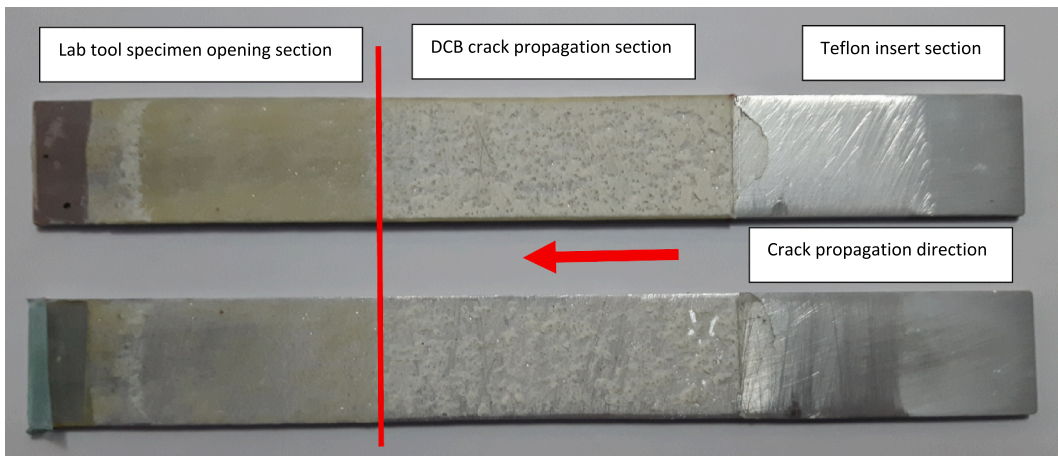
Cohesive fracture surface of specimen DCB_03, to the right of the red line the adhesive fractured during the DCB test, to the left the specimen fractured during the process of splitting the adherends with lab tools to be able to inspect the fracture surface (later not part of the test).
